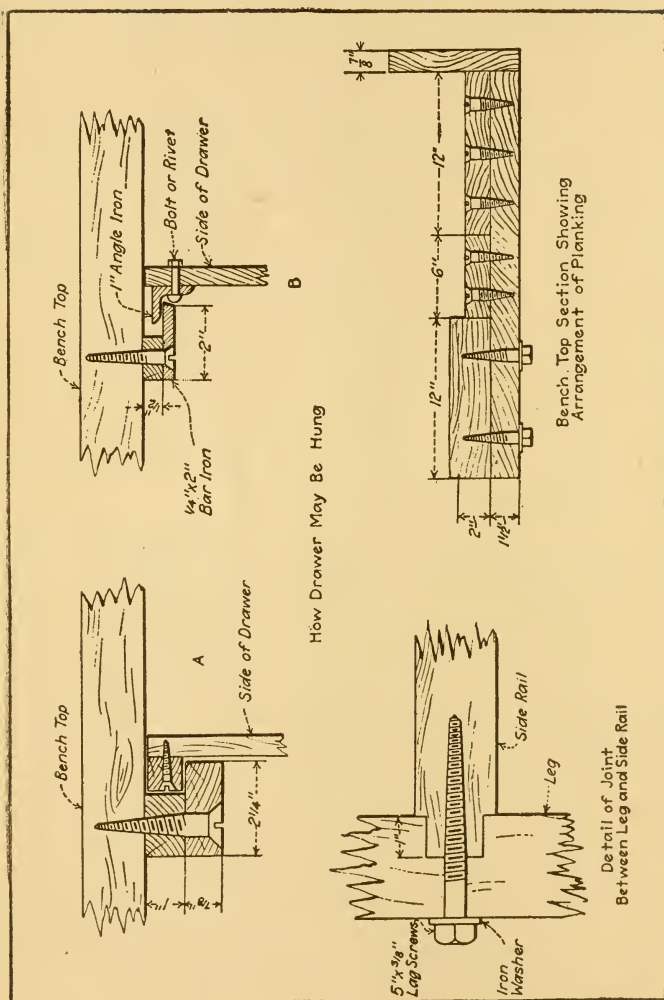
How Drawer May Be Hung and Other Details of Workbench Construction.
